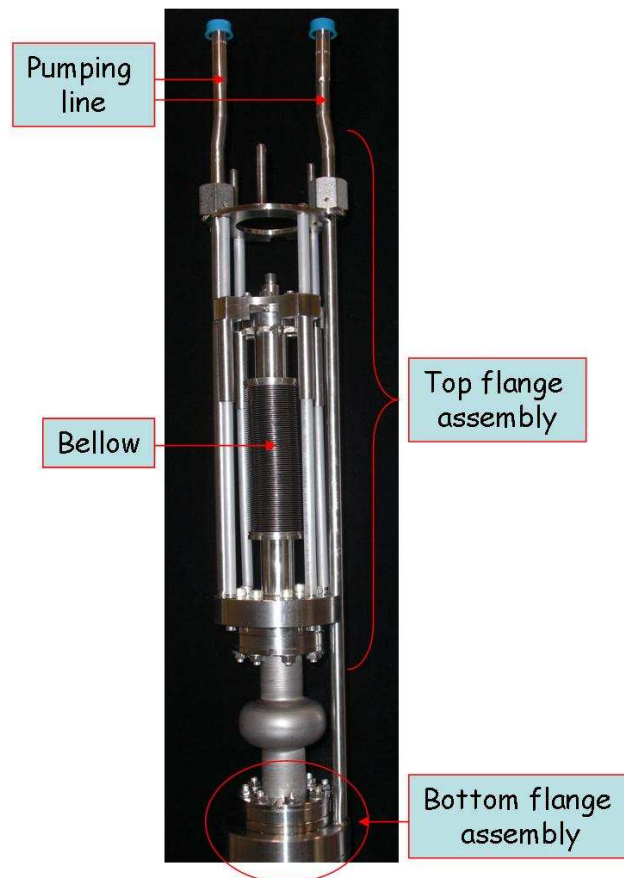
To oversimplify the system assembling, the bottom part of it has been made completely independent. The cavity is closed by two stainless steel flanges, on which the rf SMA connectors are welded. A 1.5 mm diameter indium wire is squeezed between these flanges and the cavity flat borders with eight stainless steel half round rings. Four teflon coated vertical bar lines preserve the system alignment and prevent blockage problems due to the freeze-over of the bellow upper flange during the liquid helium insertion step.
